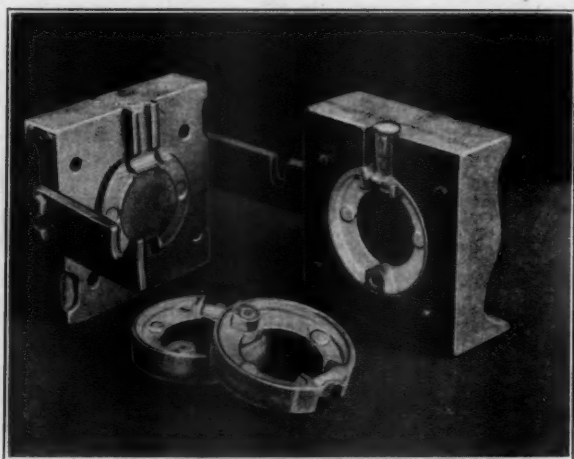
PERMANENT MOLD AND CASTINGS (MORTIMER, WM. MILLS, LTD., BIRMINGHAM, ENGLAND)
